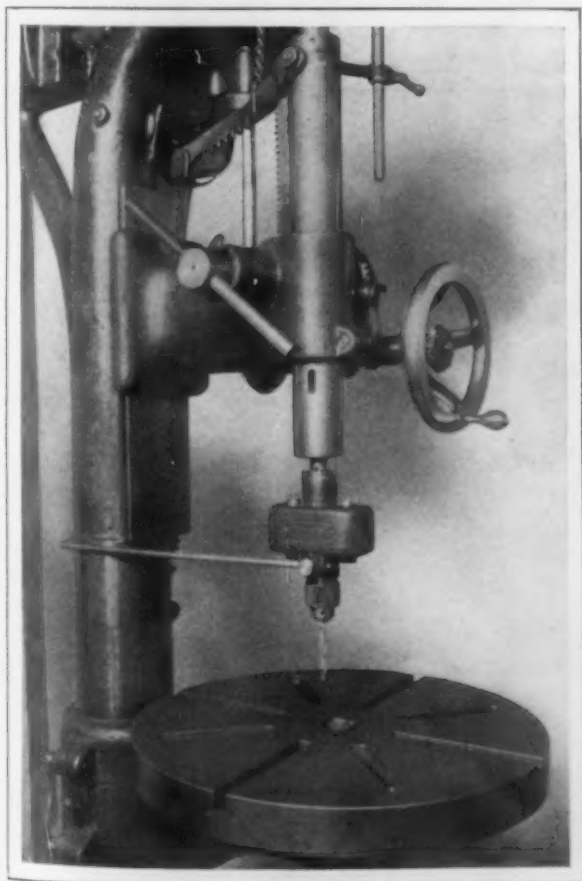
A 21-In. Upright Drilling Machine Equipped with the Graham Twist Drill Speeding Device
